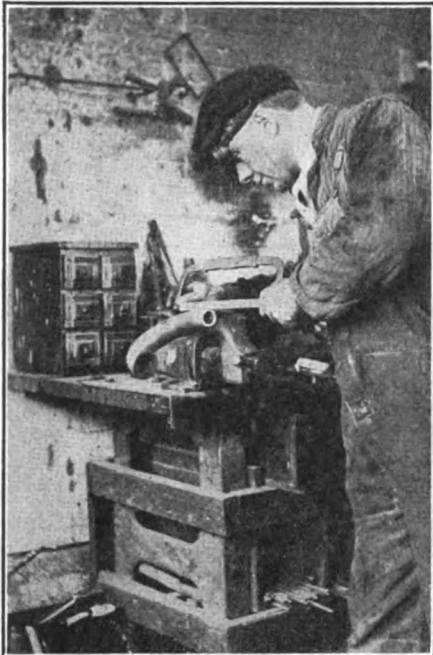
SAWING A GROOVE IN THE CRACKED MANIFOLD
